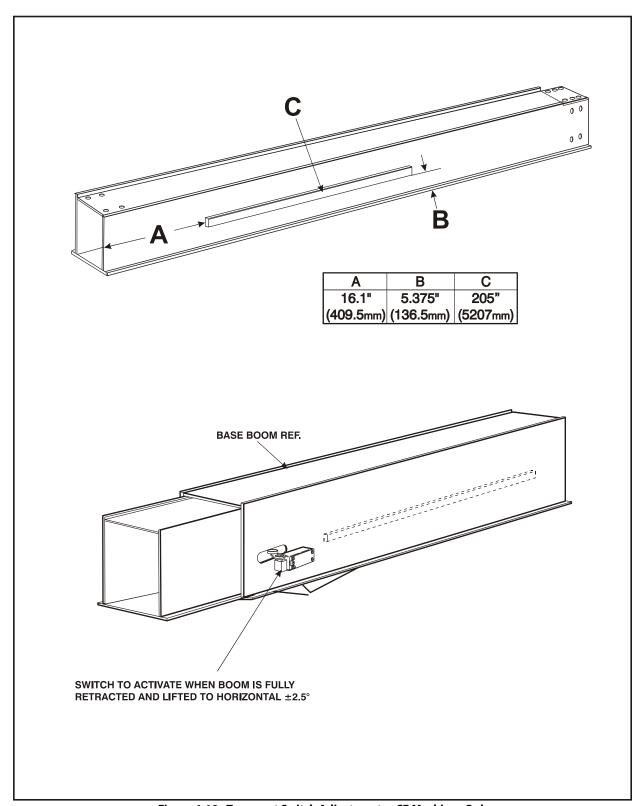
Transport Switch Adjustments - CE Machines Only
